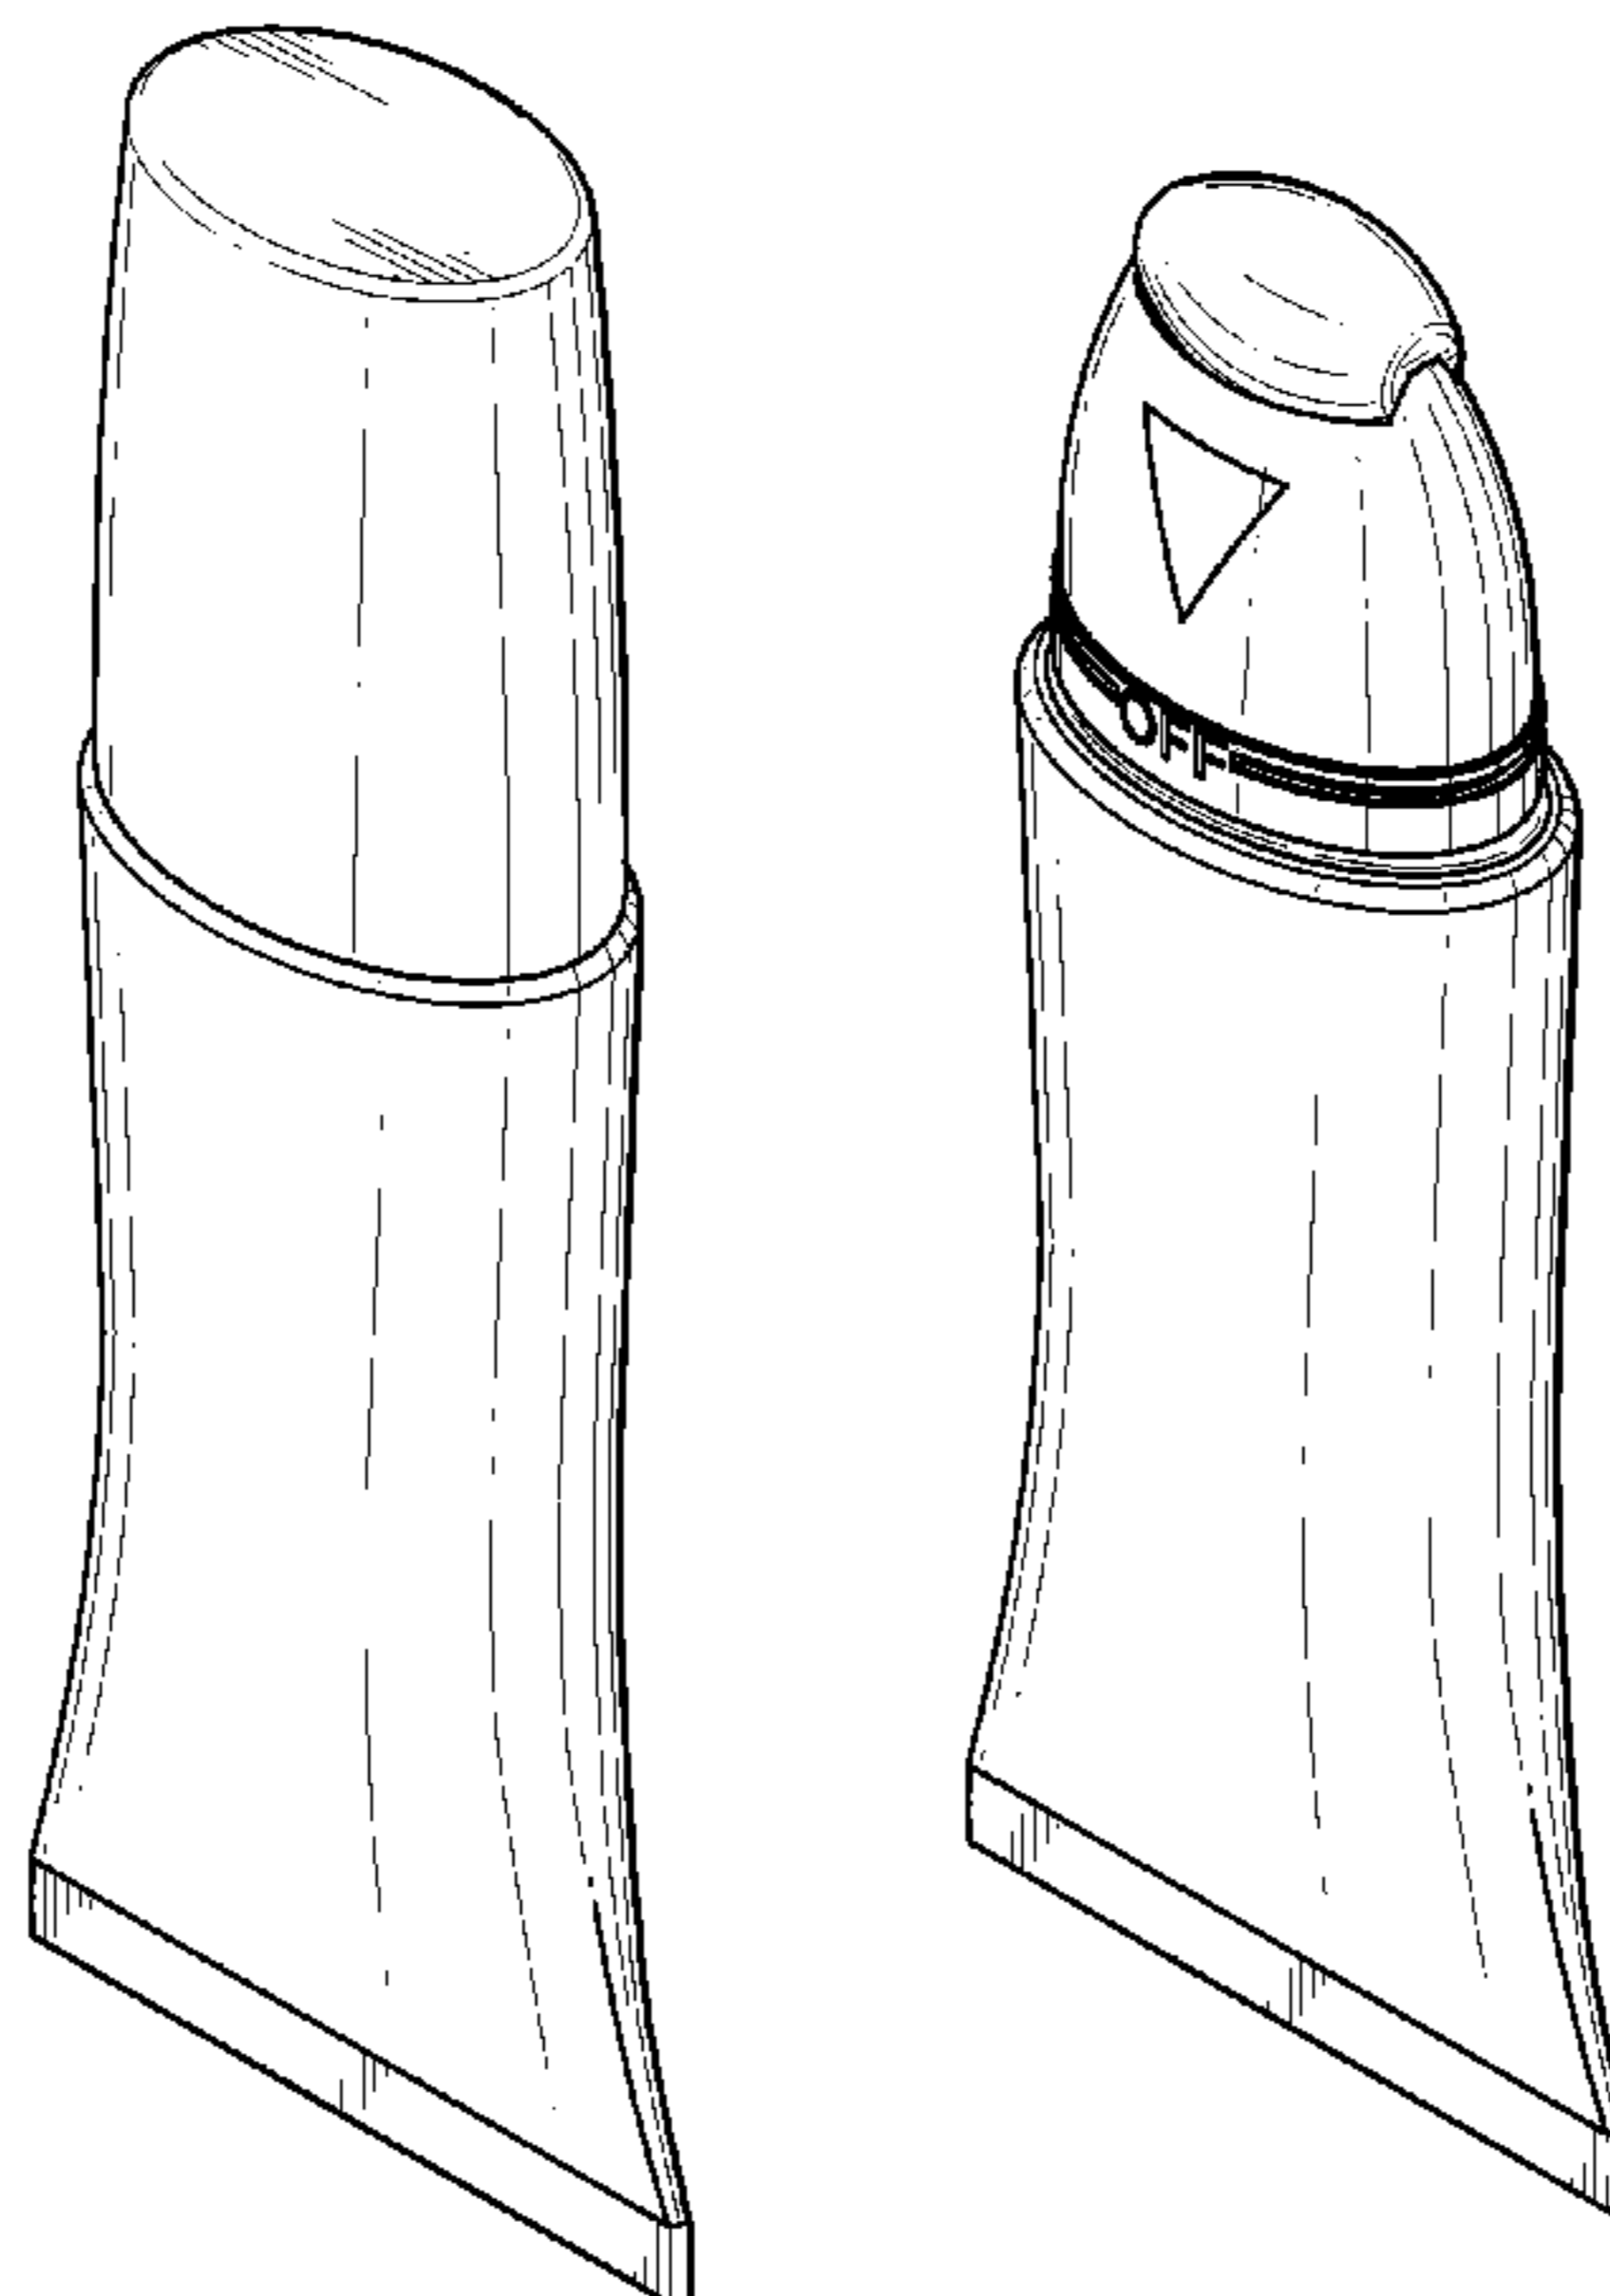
is a view similar to FIG. 6, but with the cap off;
